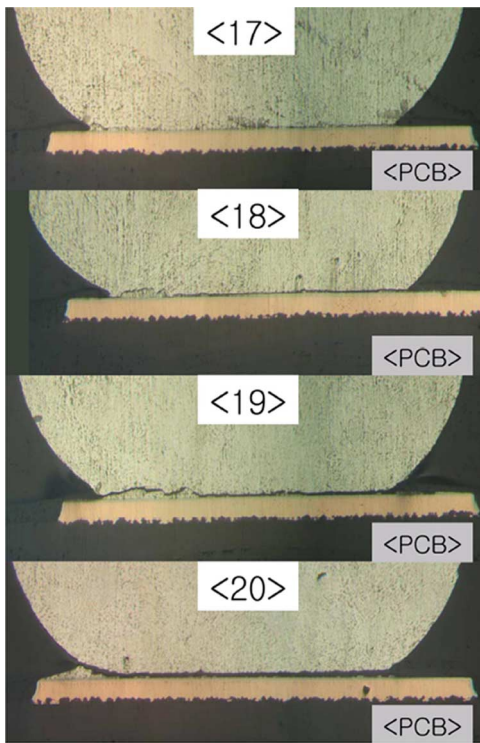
Optical micrographs showing the cracks at each solder joint in the SnPb-PBGA package.
